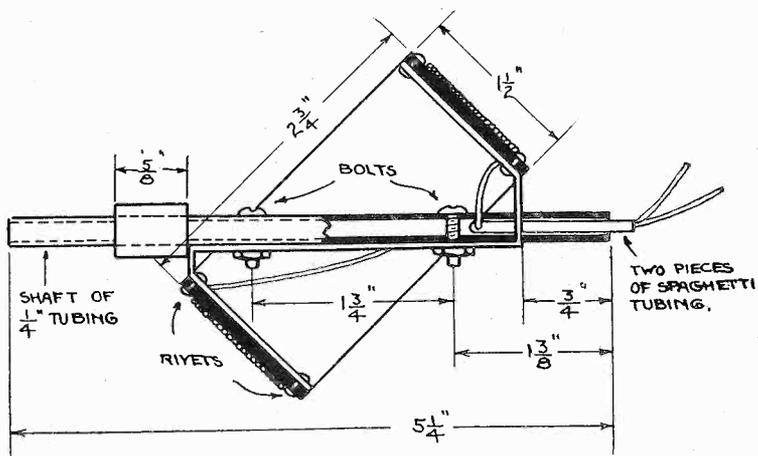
Diagram showing the manner of fastening the coil on the standard. The shaft, which is hollow, is then bolted or soldered to the Z-shaped piece. This makes a solid looking and working rotor for the Ultimate Coupler.
